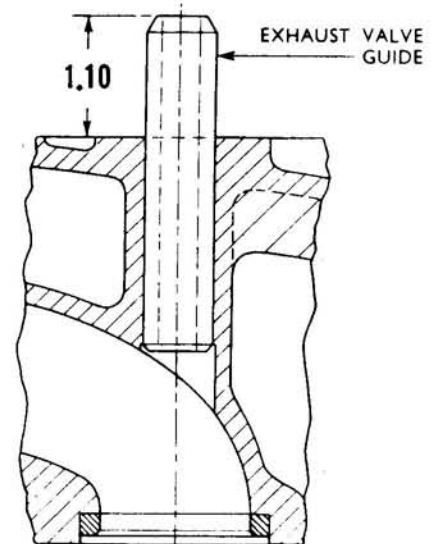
Exhaust valve guide should protrude 1.10 inch above cylinder head as shown. Note: Intake and exhaust valve guides are alike but are installed to different protrusion above cylinder head.
